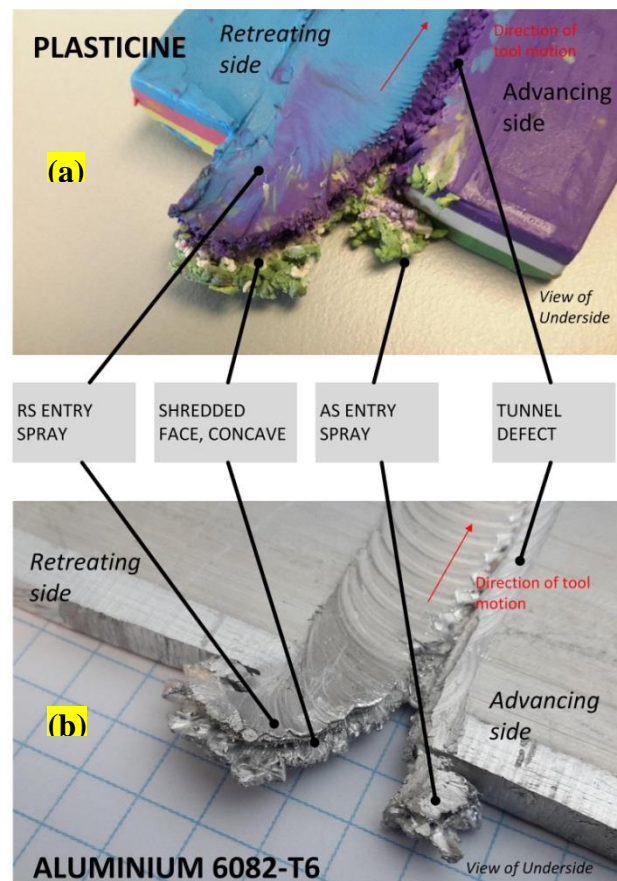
Macroscopic structural features of bobbin friction stir welding, (a) plasticine (75 rpm, 50 mm/min) and (b) aluminium 6082-T6 (650 rpm, 400 mm/min), in both cases rotation is clockwise viewed from above, though this view is from below. Figure 5.4 shows the common features. (Figure 5.4 is an adaptation of Figure 4.6(b)).
